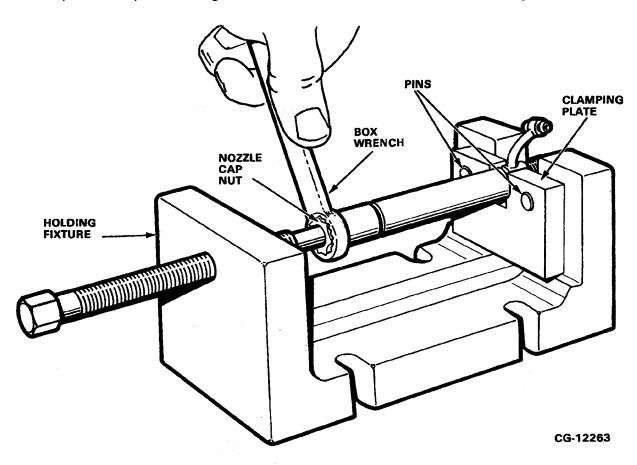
Mount Nozzle in Holding Fixture to Disassemble
